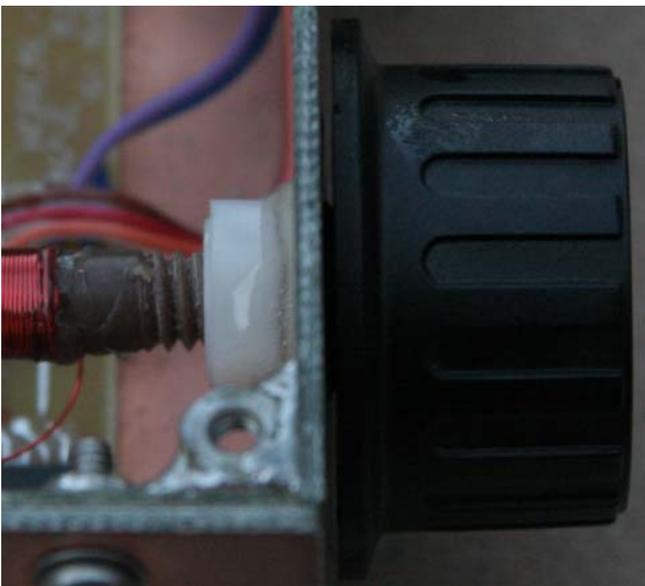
With PTO screw fully inserted, adjust tuning knob to have a small amount of front panel clearance.
